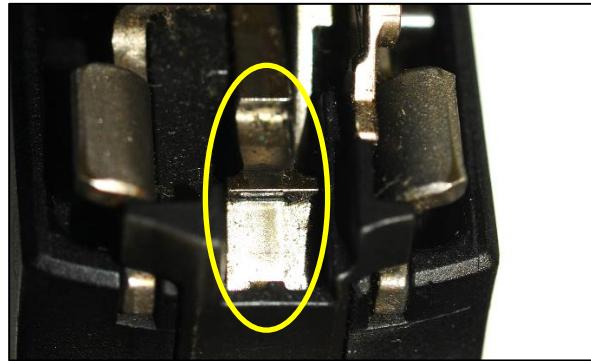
Top rear view of sear (circled) and off-center striker drag marks
